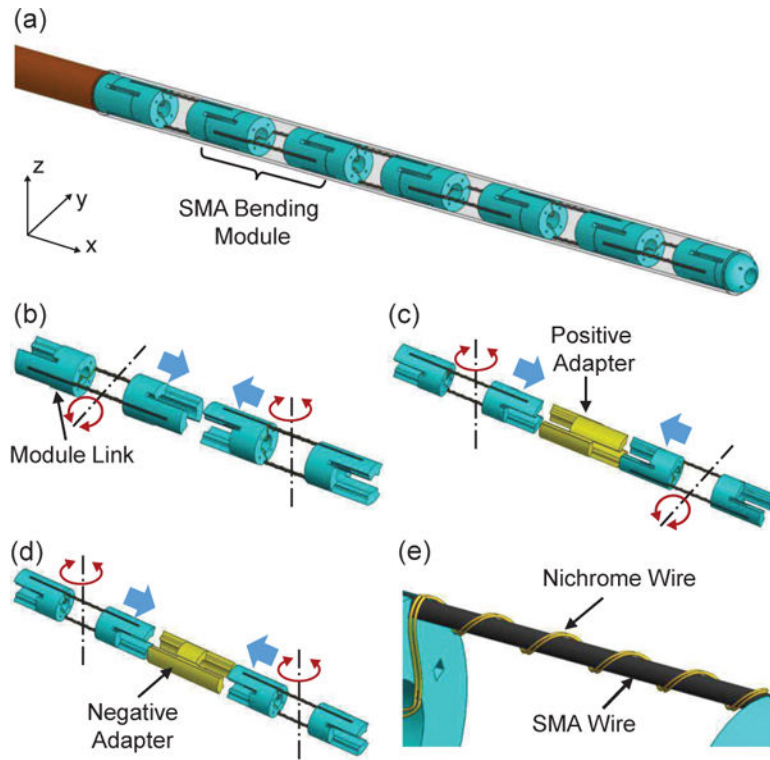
3D models of the catheter tip: (a) steerable tip comprised of multiple bending modules, (b) assembly of two bending modules with orthogonal bending directions, (c) assembly of two bending modules via a positive adapter, (d) assembly of two bending modules via a negative adapter, and (e) Nichrome coils routed around an SMA wire of a bending module. The red arrows show bending directions and the blue arrows show assembly directions.
